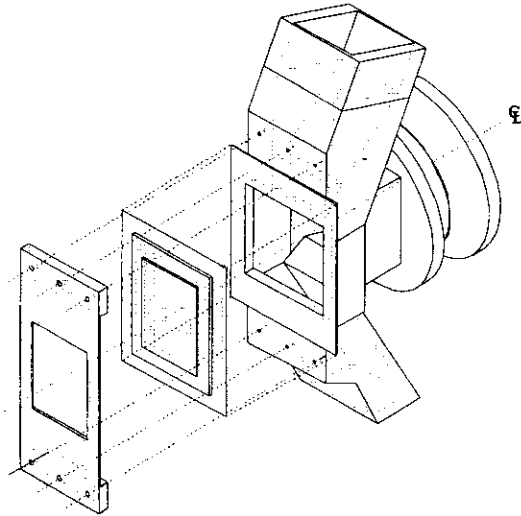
Replaceable Backwall Attachment Scheme (Bolt-Fix, Welding-Seal Type)
